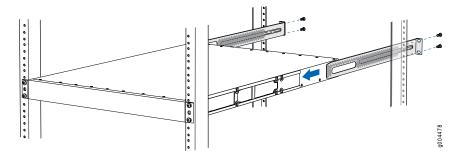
Slide Mounting Rail onto the QFX5100-96S Rear Mounting Blade
